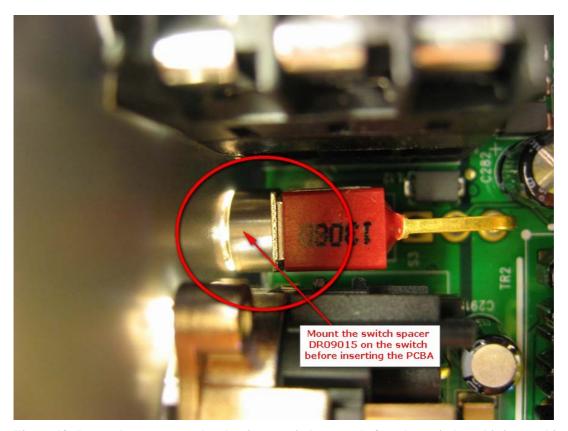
Remember to mount the aluminum switch spacer before the main board is inserted in the inner box.
